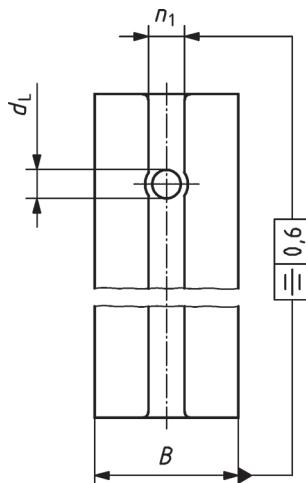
Type M1 — Dimensions (see [Table 3](#))
